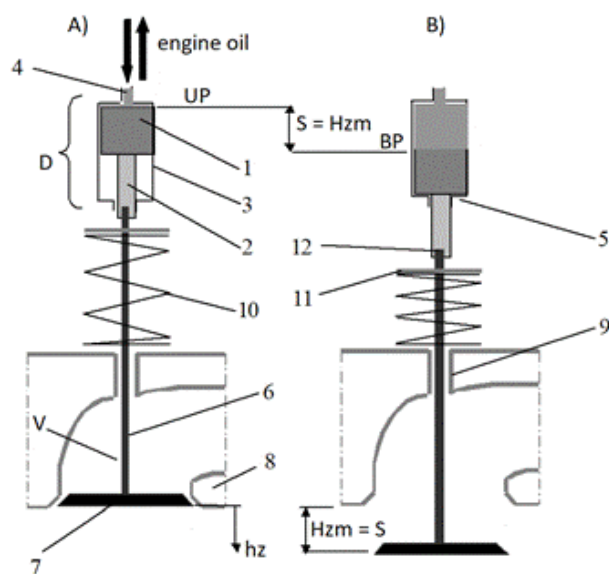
Scheme of the electrohydraulic system: drive valve using a valve spring: (A) the drive (actuator) in a state corresponding to a closed valve, (B) the drive (actuator) in a state corresponding to an open valve; BP, bottom position of the drive piston; D, hydraulic drive (actuator); hz, valve lift; Hzm, valve stroke; S, stroke of drive piston; UP, the upper position of the drive piston, V – valve of engine: 1 – drive piston, 2 – piston rod, 3 – operating cylinder, 4 – inlet channel of operating (engine) oil, 5 – stop-limiting piston stroke, 6 – valve stem, 7 – valve head, 8 – seat insert, 9 – valve guide, 10 – valve spring, 11 – lock of the valve spring, 12 – connector between the valve and piston rod
